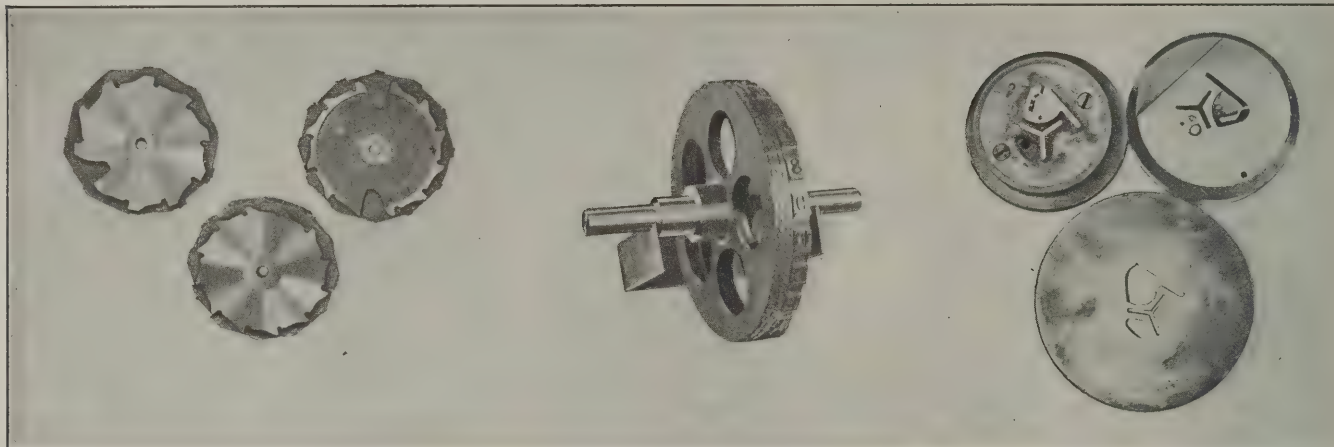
Steel Wheels, with both Ratchet Teeth and Figures on Rim, cut in Engraving Machine
